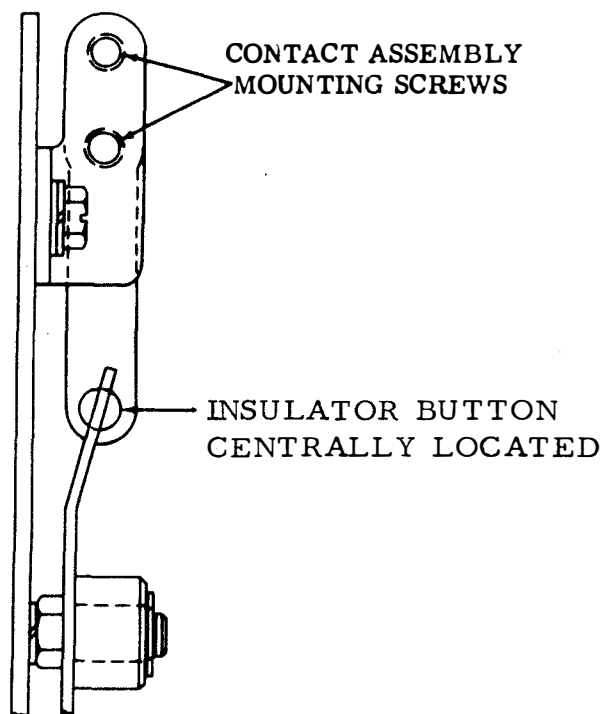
Contact Assembly, Reperforator, Right Side View
